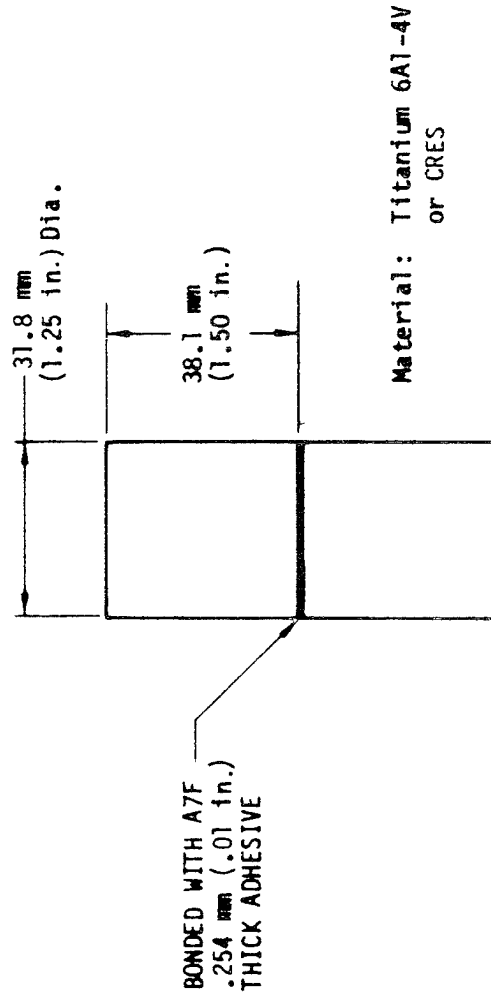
FLATWISE TENSION ADHESIVE TEST SPECIMEN
